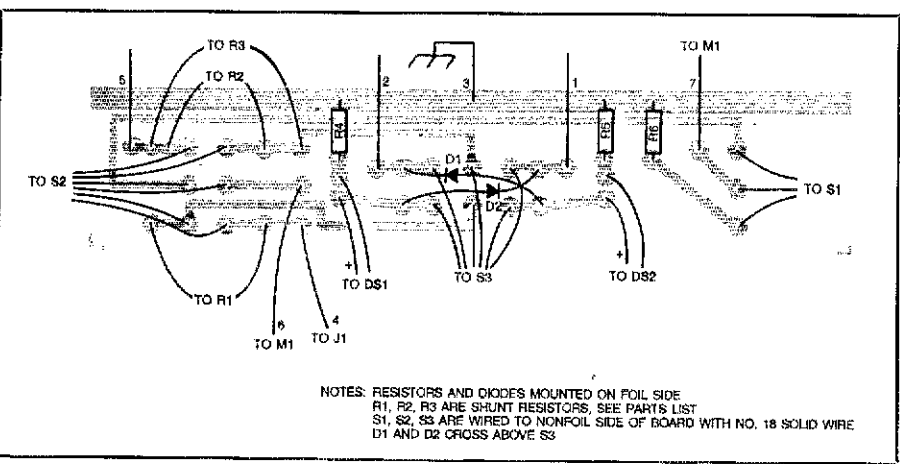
Parts-placement guide for the Lunchbox. Parts are mounted on the foil side of the PC board; the shaded area represents the copper pattern.
